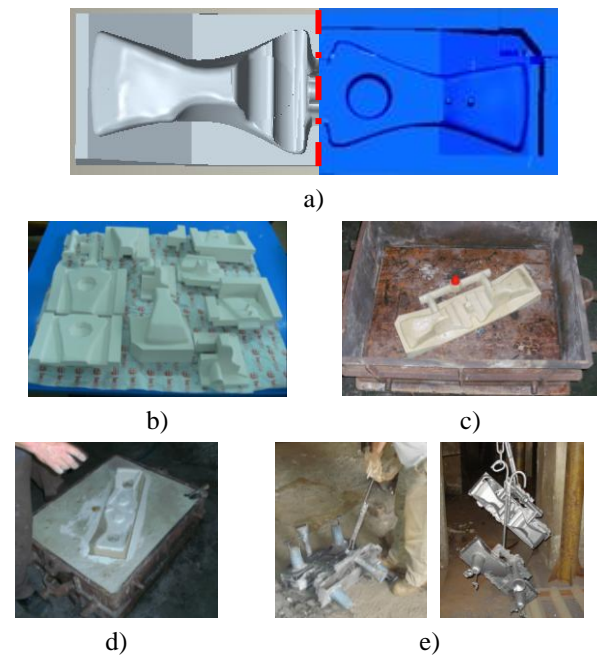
Model and core of mold for sand casting (a), produced 3DP parts of tools for casting (b), forming of mold for sand casting (c), (d), casted part of cross member of scraper conveyor (e)
